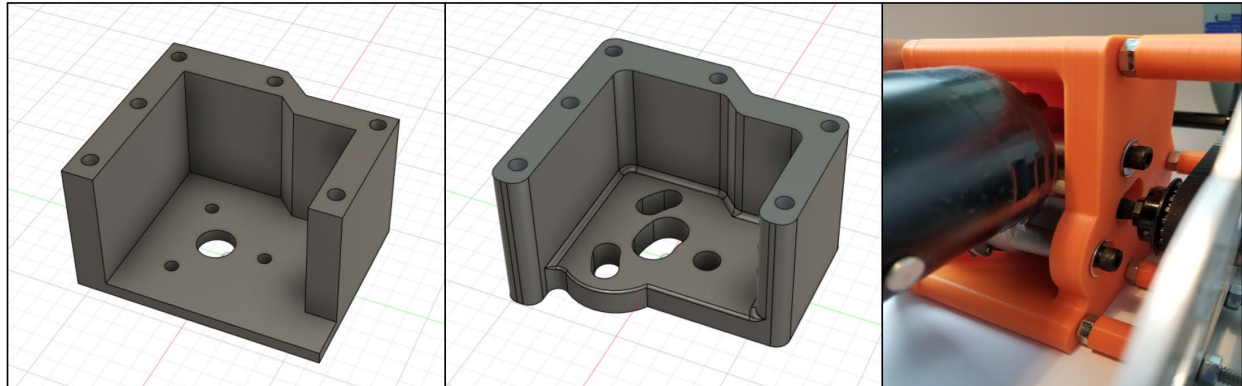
Hex Adaptor and Motor Mount CAD and Finished Piece
